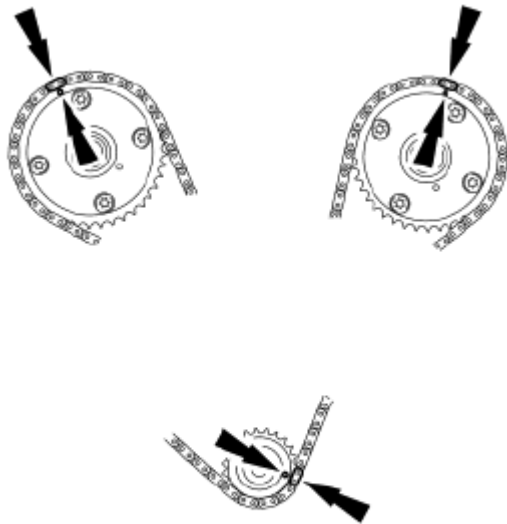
Locating Crankshaft Timing Chain Sprocket
